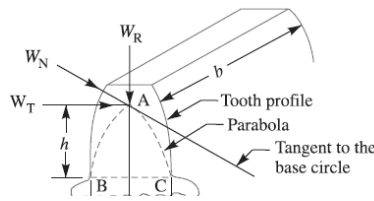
Shows the tangential tooth load direction on the gear tooth profile
